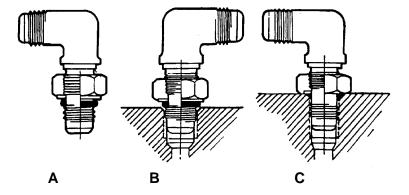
Positioning-Type Fittings for Hydraulic & Pneumatic Systems
